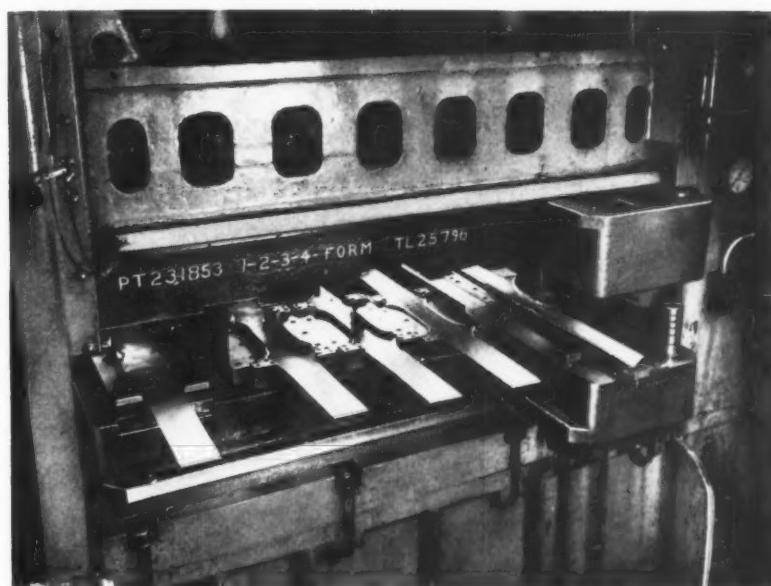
Preliminary Forming Operations in the Manufacture of Rear-axle Housings at the Olds Motor Works, Using a Hydraulic Press with a Five-station Die
